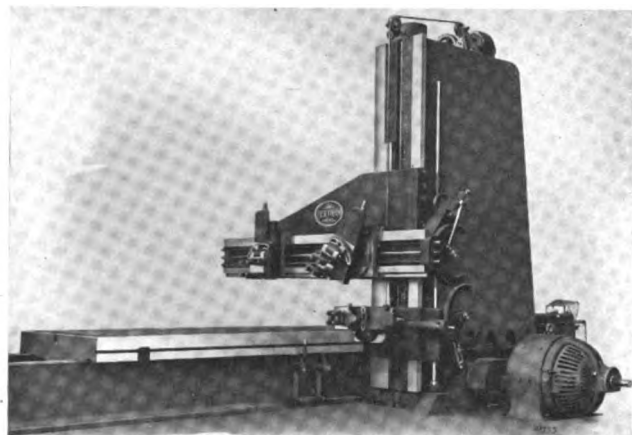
72-Inch Open Side Planer, with Adjustable Speed, Direct Current Reversing Motor Drive and Pat. Control
